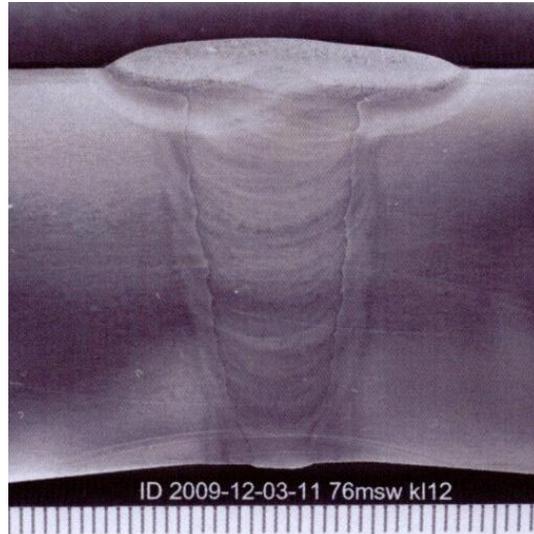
Macro cross section of a qualification weld on pipe with wall thickness 34.6 mm, for the 76 msw tie-in weld.
